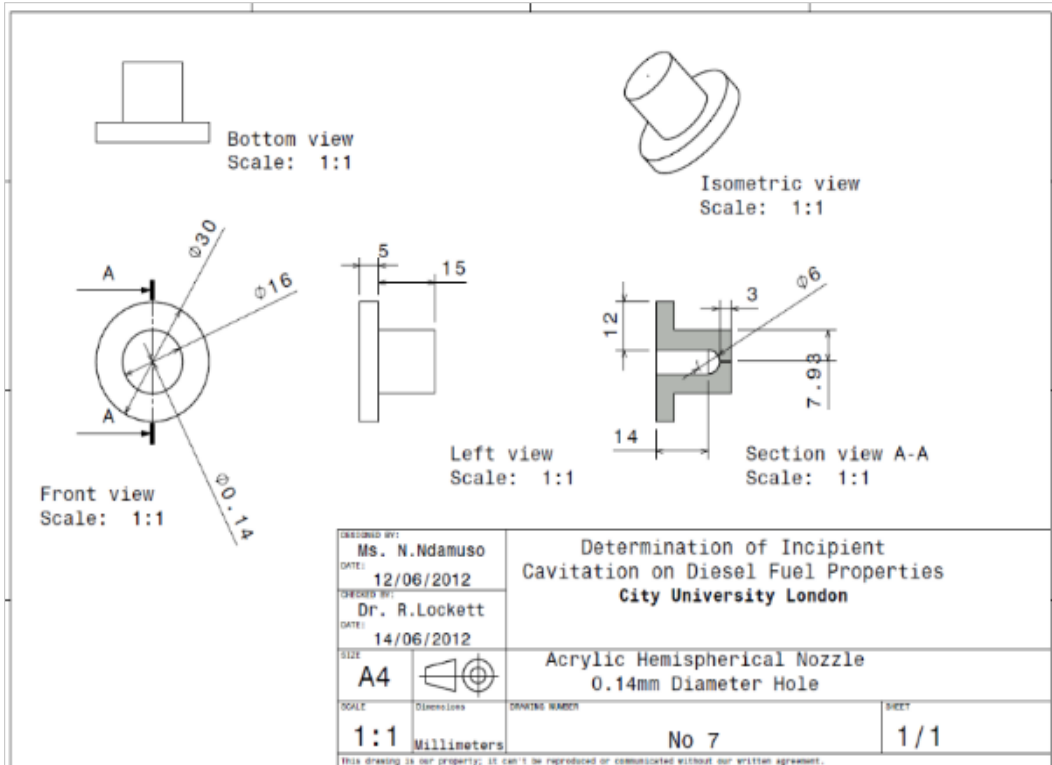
2 Acrylic Hemispherical nozzle, 14mm hole diameter – 3mm nozzle depth
